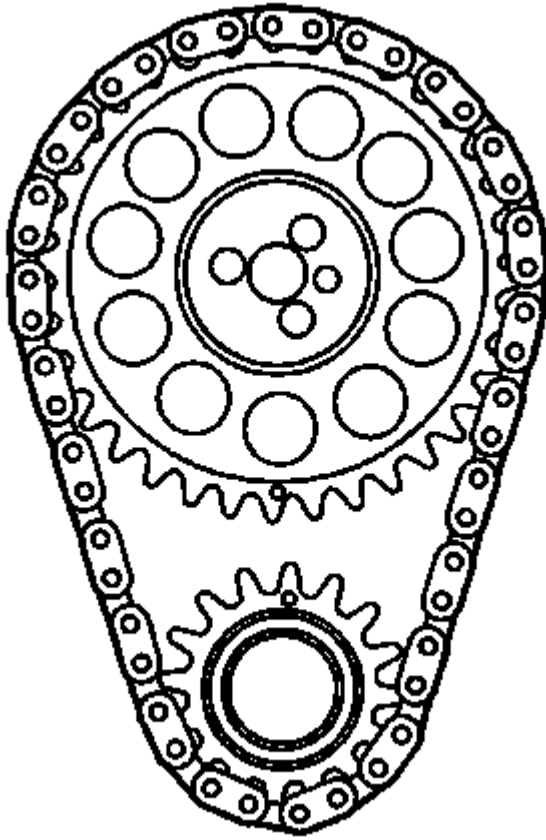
View Of Camshaft & Crankshaft Sprocket Timing Marks
